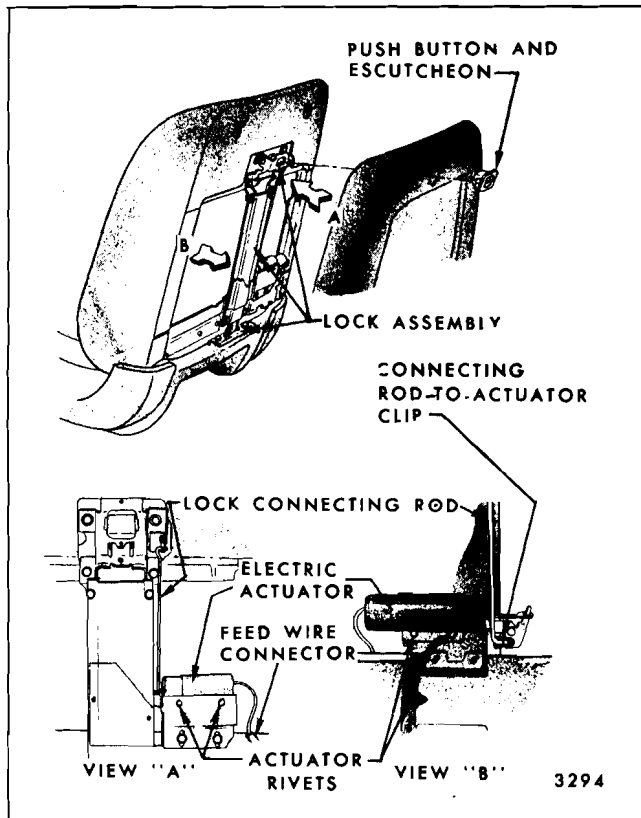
Strato Seat Back Electric Lock and Lock Actuator - Cadillac
